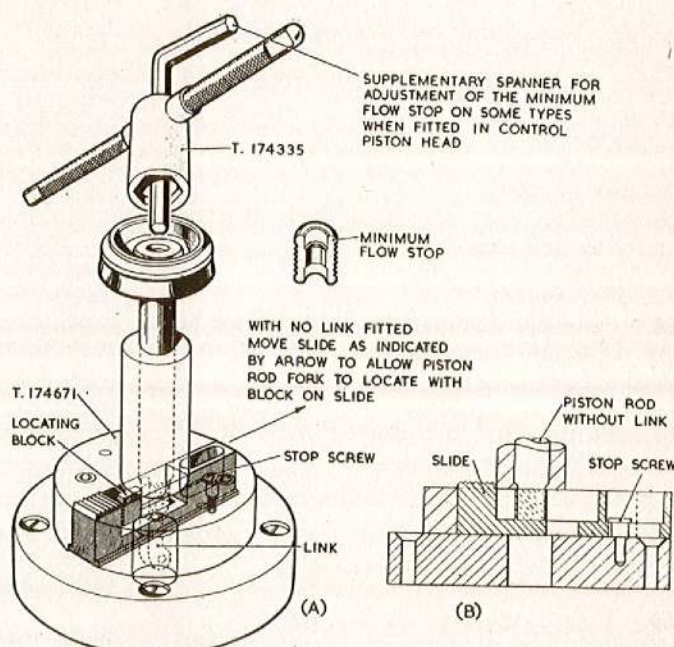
Piston rod located in base T.174671, while tightening piston screw with spanner T.174335 (A) with link, (B) without link
